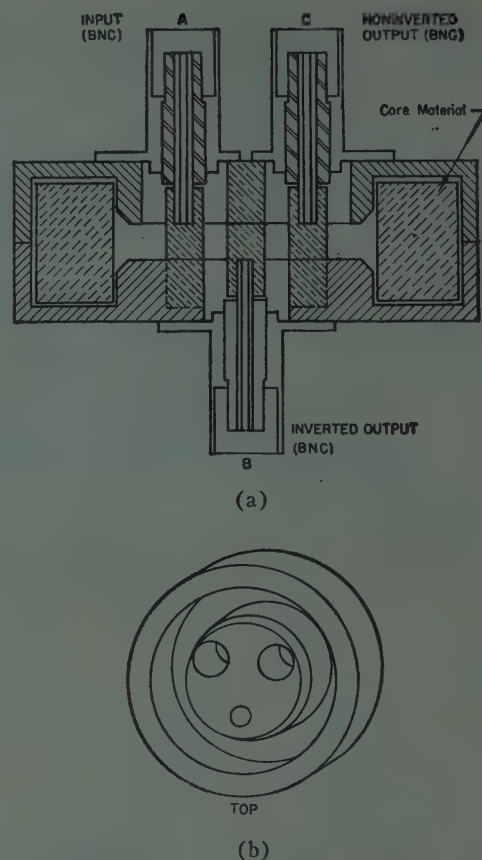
Details of balun transformer construction. (a) Assembled cut-away. (b) Inside view (cross-connecting rods and coaxial connectors removed).
